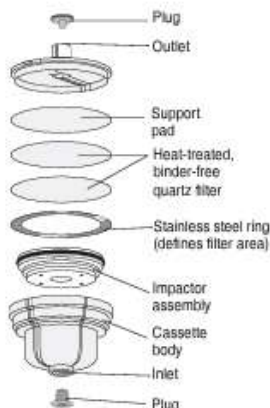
Exploded view of DPM Cassette (Cat. No. 225-317)
